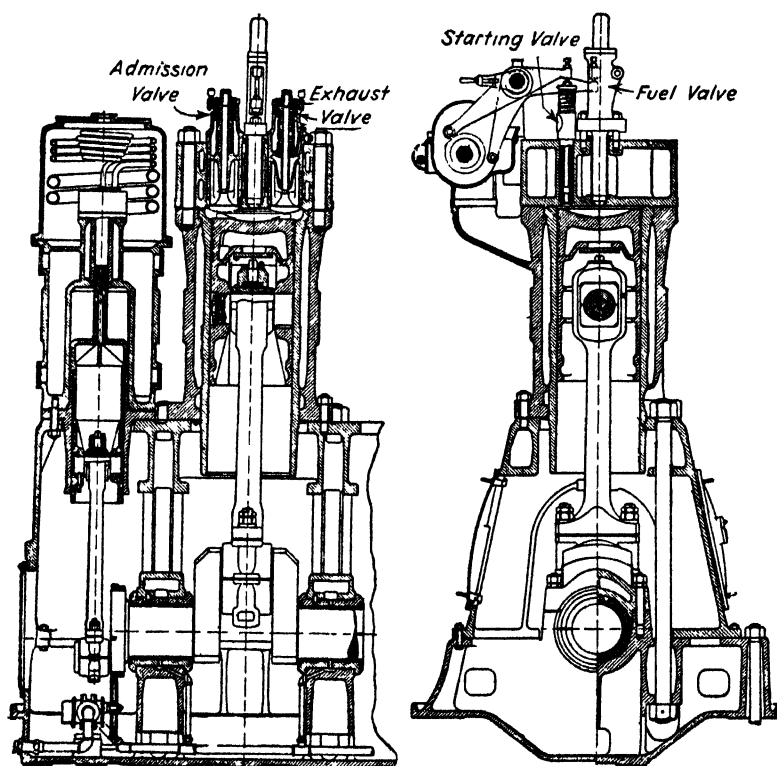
Sectional View of Air Compressor and Working Cylinder of Busch-Sulzer Bros. 4-Cycle Stationary Engines
